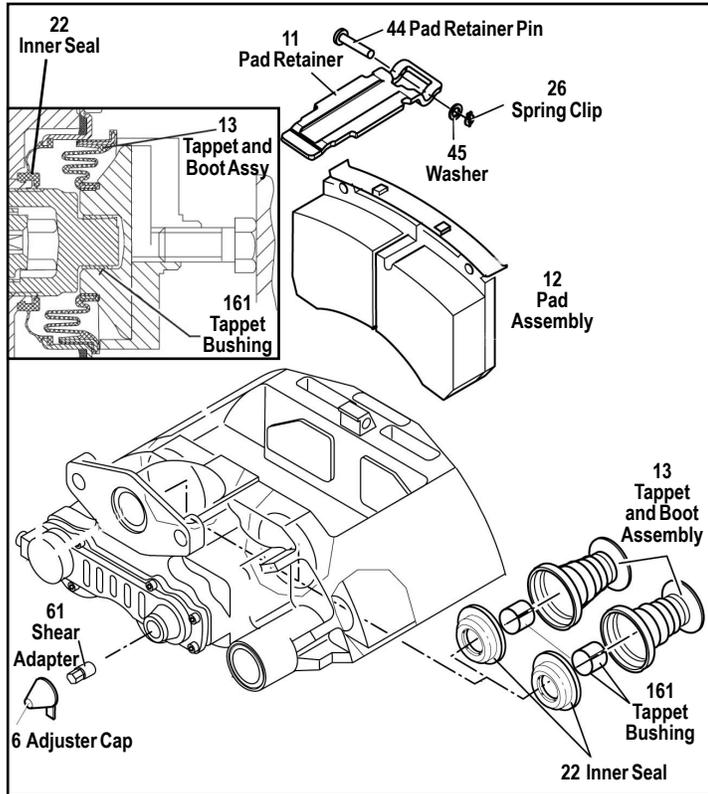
ADB EXPLODED AND SECTION VIEWS
